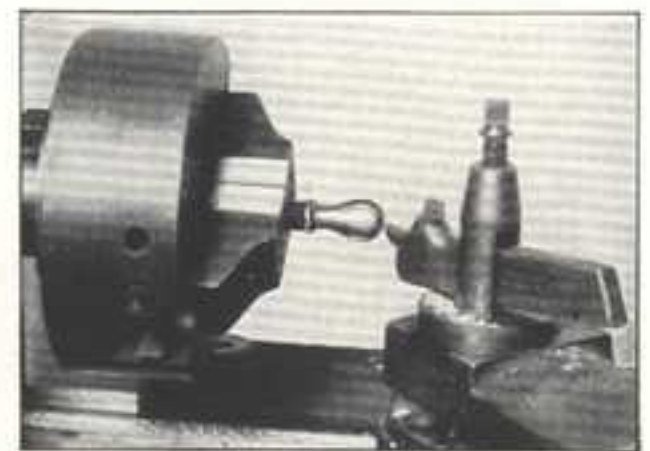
An Irregular Shaped Piece Held in a Two-Jaw Chuck
